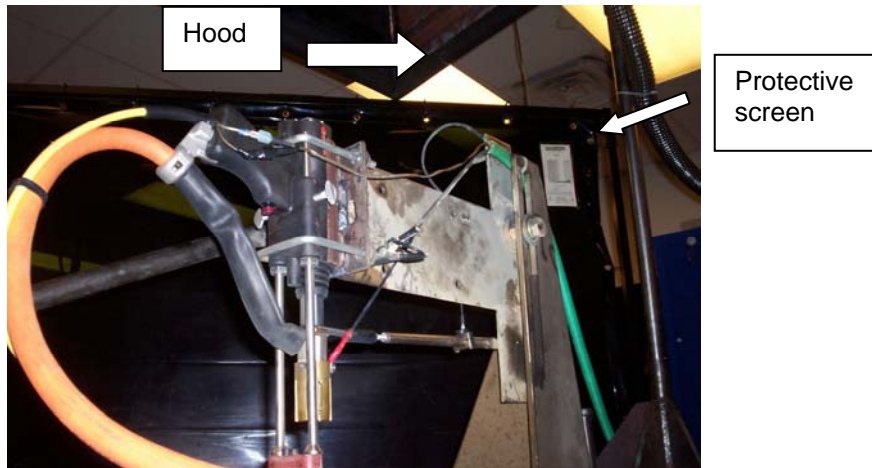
Final version of the automated welding setup, showing safety devices: fume exhaust hood and arc radiation shielding screen.
